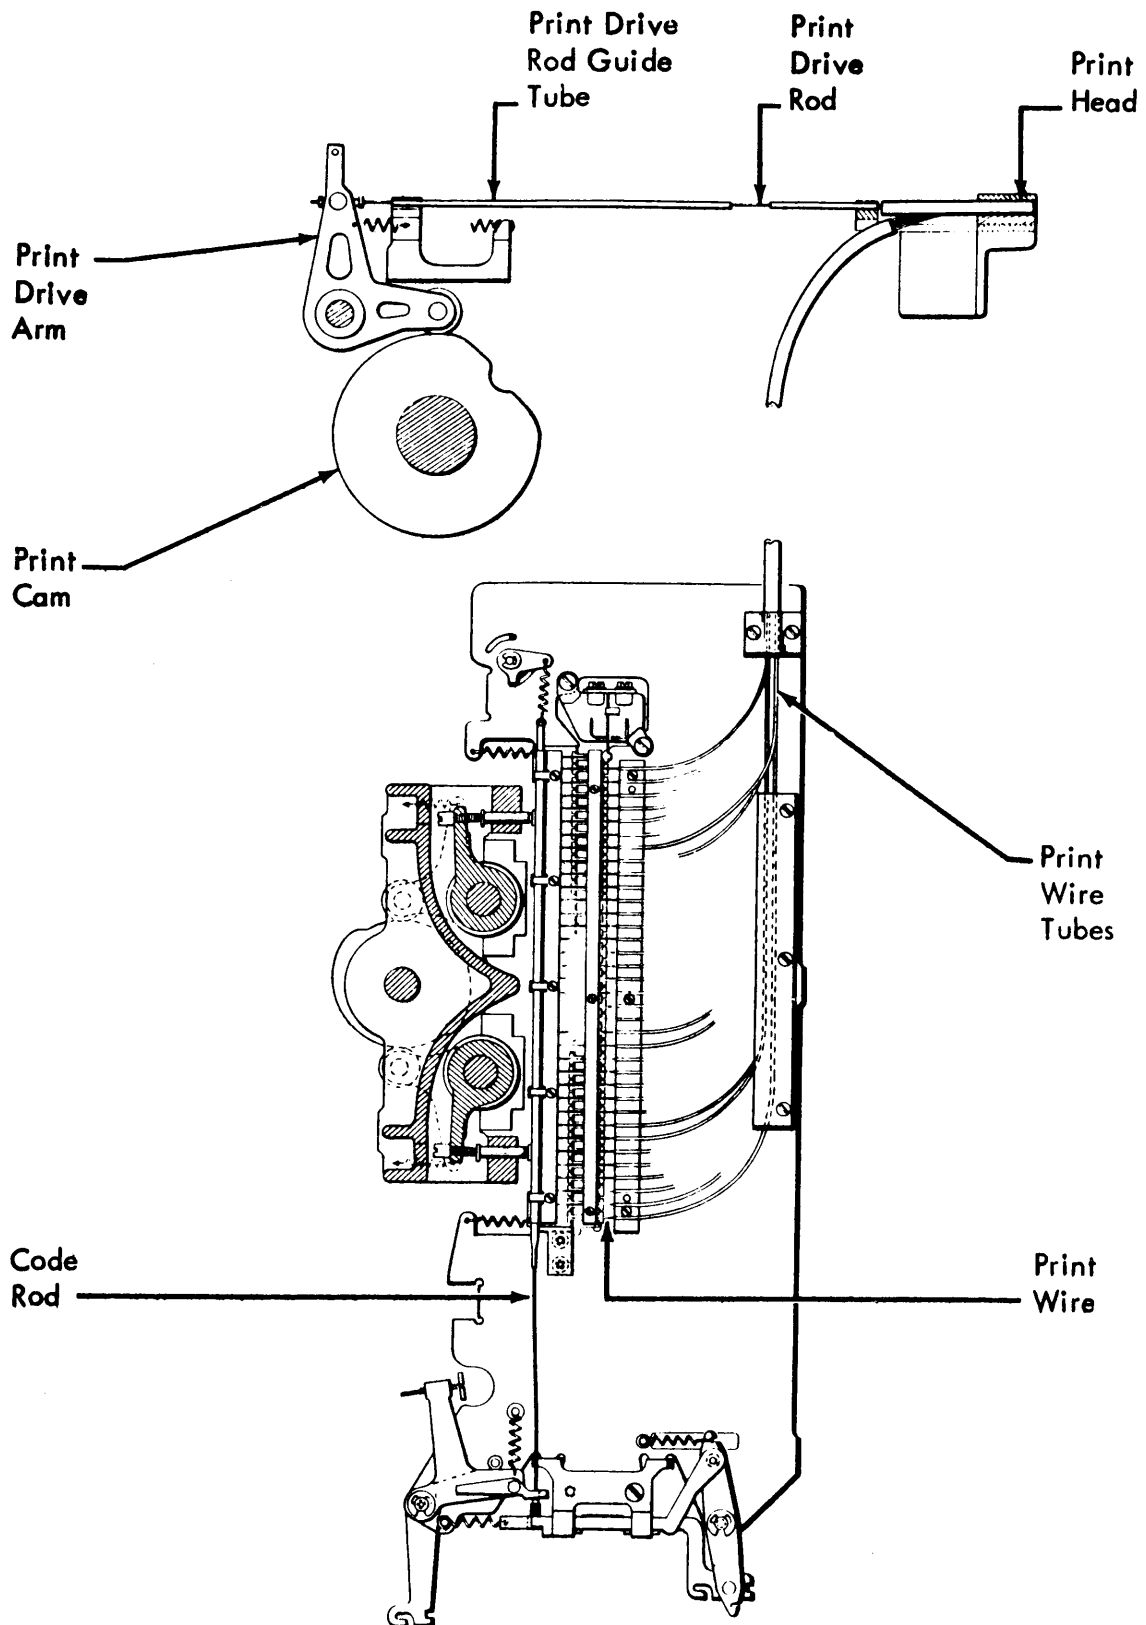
Print Mechanism Plate and Mechanical Drive
